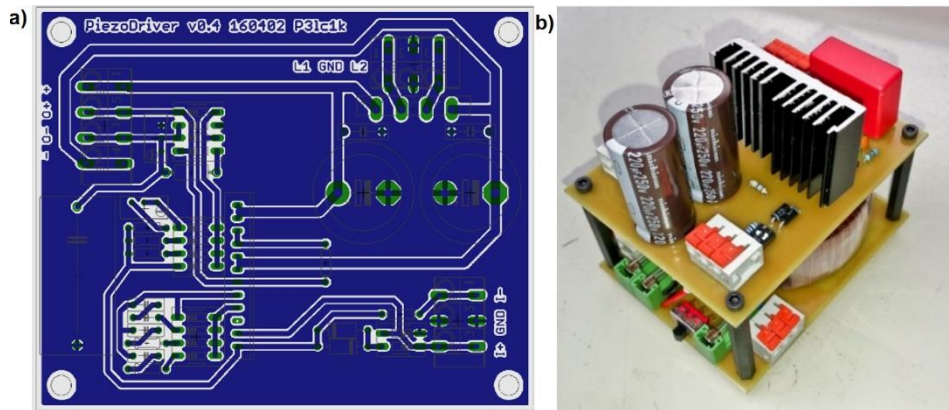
a) Overview of PCB, b) assembled charge amplifier.
